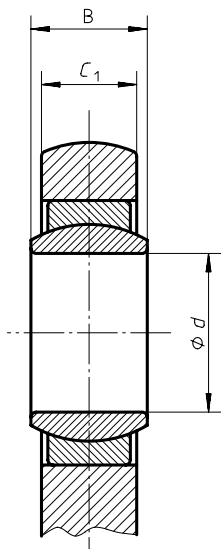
Spherical plain bearing rod end with mounted spherical plain radial bearing (cartridge design)
